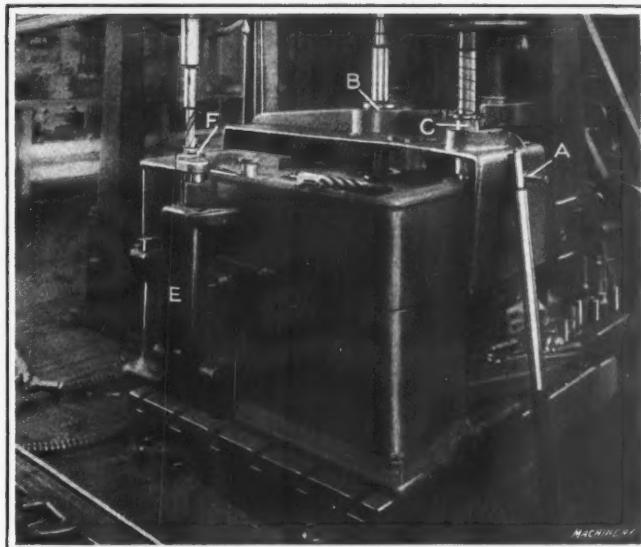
Close View of Drill Jig used on Machines shown in Fig. 7
